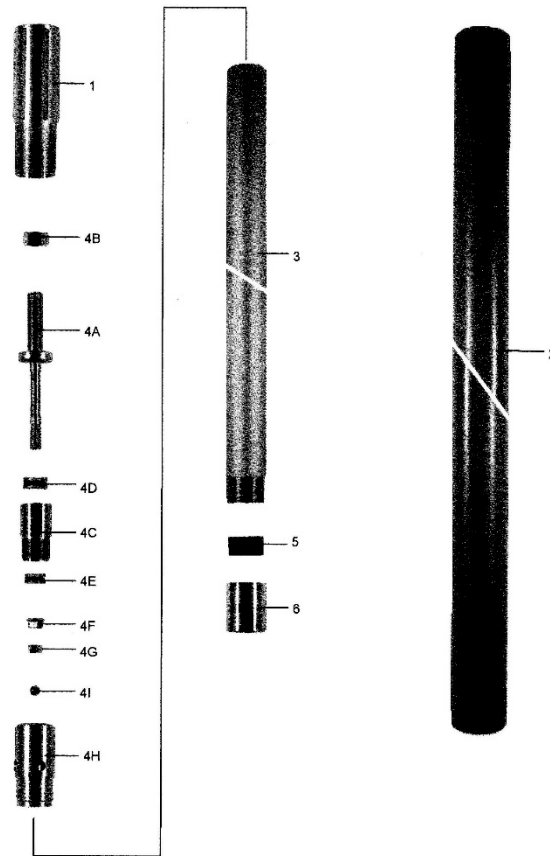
The core barrel components seen in an exploded view from the American Diamond Tool catalogue.
